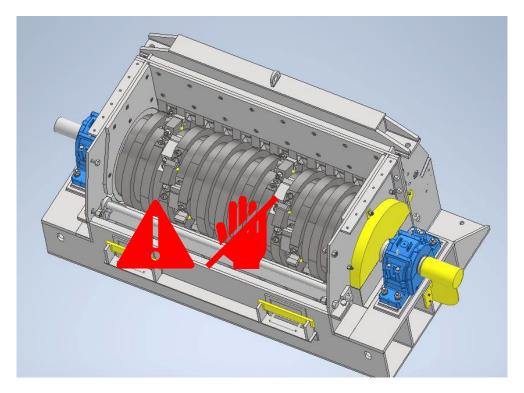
Positioned Rotor Assembly (Rear Door and Hopper Removed for Clarity)
